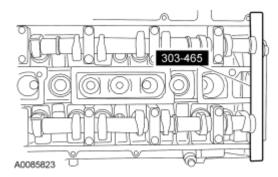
Identifying Special Camshaft Tool (303-465) Courtesy of FORD MOTOR CO.
